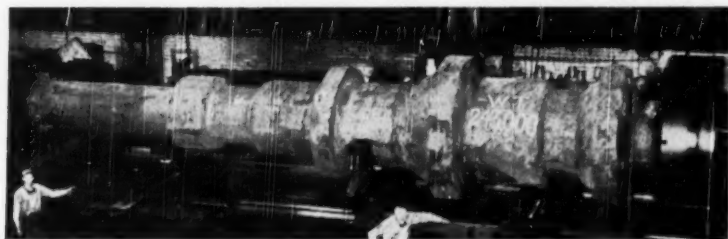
WATER-WHEEL-SHAFT FORGING IN 96-IN. LATHE READY FOR ROUGH-MACHINING
